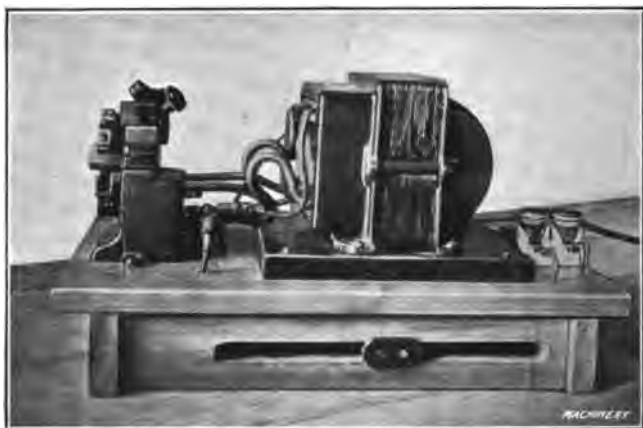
Example of Unit Equipment for soldering Optical Frames
